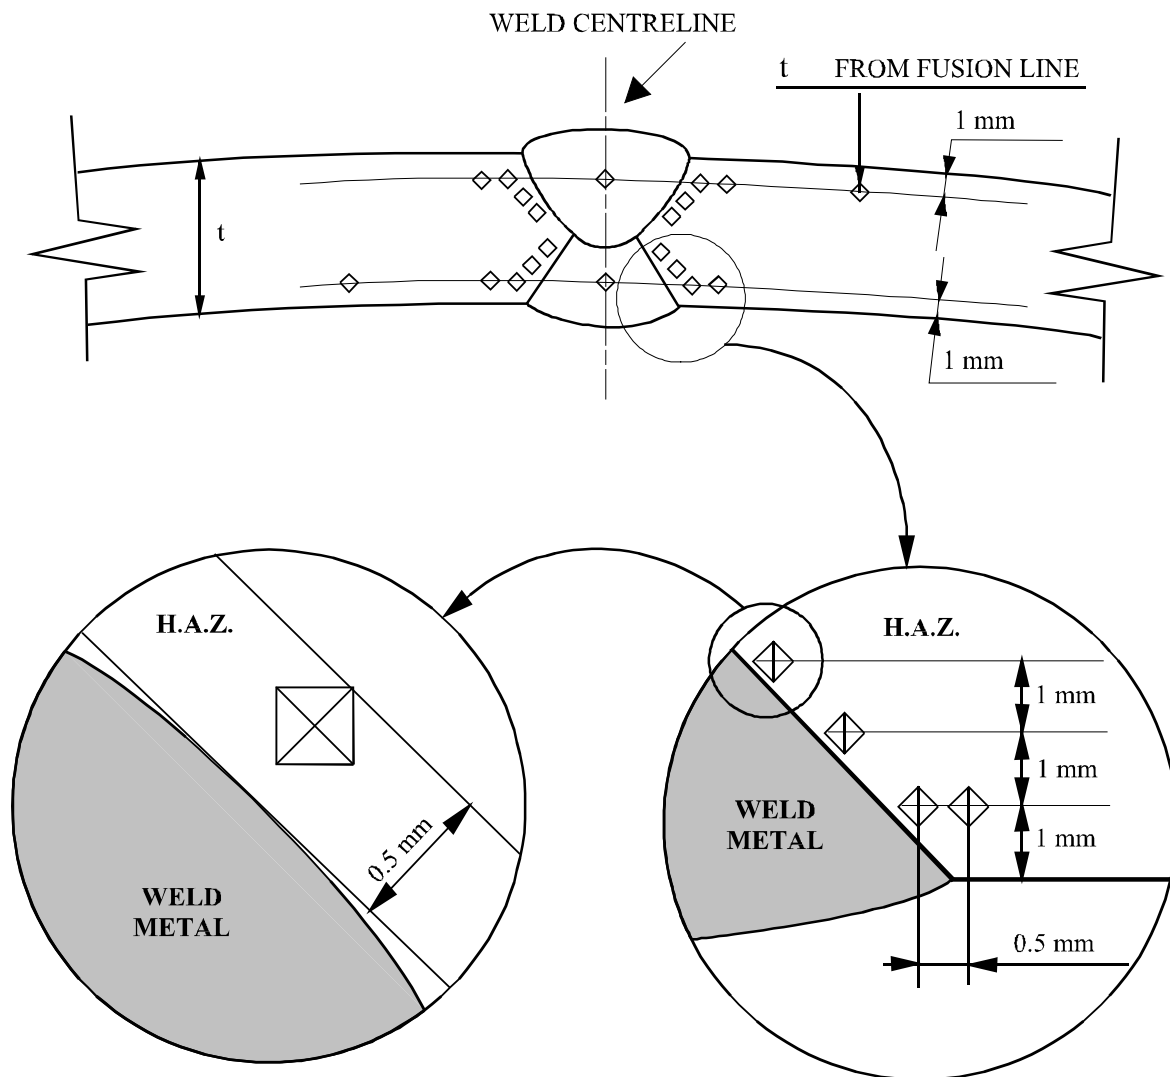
Vickers hardness survey in weld for production tests (longitudinal seam)
